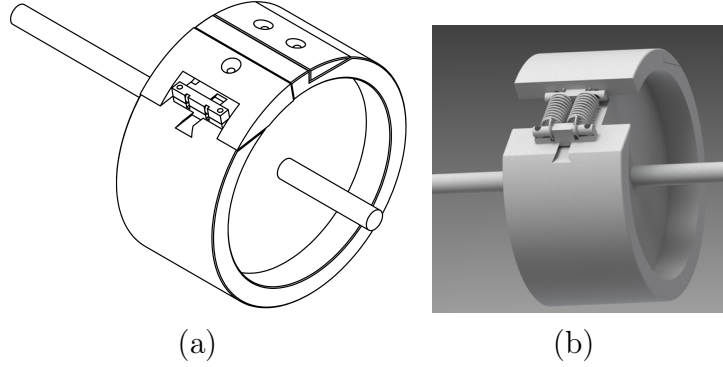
(a),(b) Technical drawing of the rotating drum, which allows fixing a printing plate on the surface.
